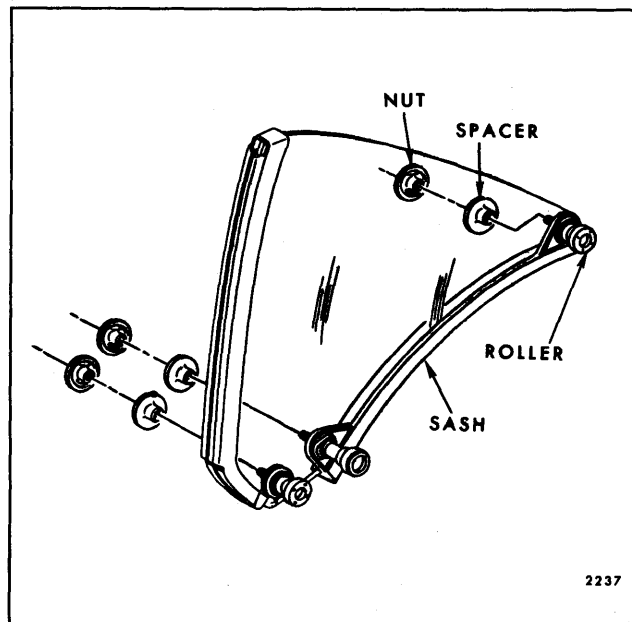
Rear Quarter Window Assembly - "E-87" Styles
